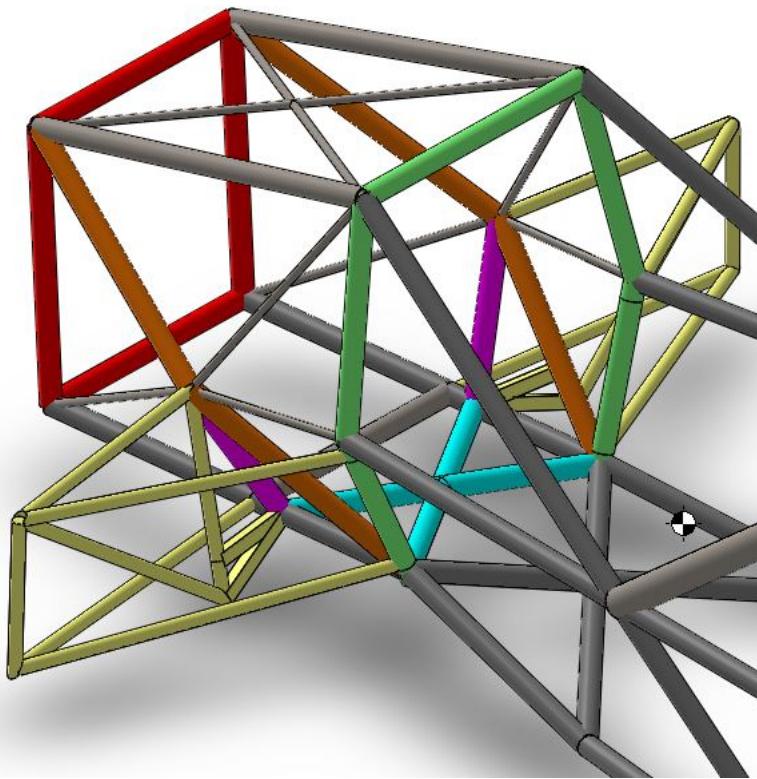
Vertical-Shock Pullrod Design. The picture is taken from the upper left rear of the car.
